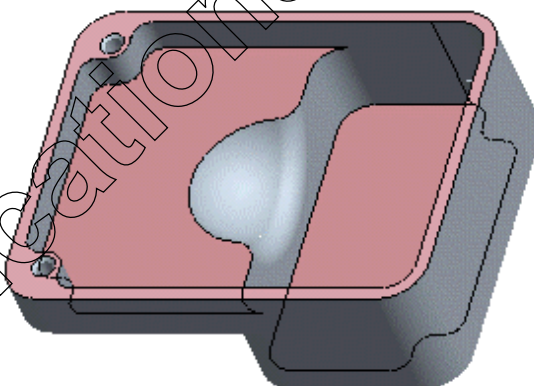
Showing the additional surface selected at the bottom of the deeper pocket.
